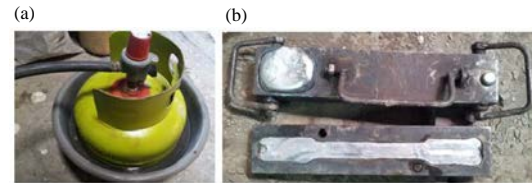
(a, b): Warming of LPG tubes (a) and successful aluminium castings (b)
